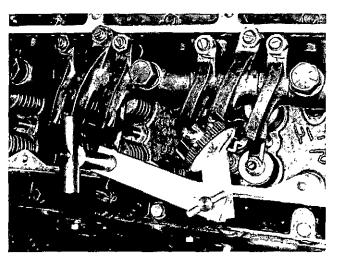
(V514114) Dial indicator in place - extension in contact with plunger, V-903 Series
